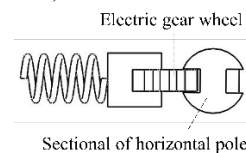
Electric gear and gear rack in longitudinal pole (side view)
